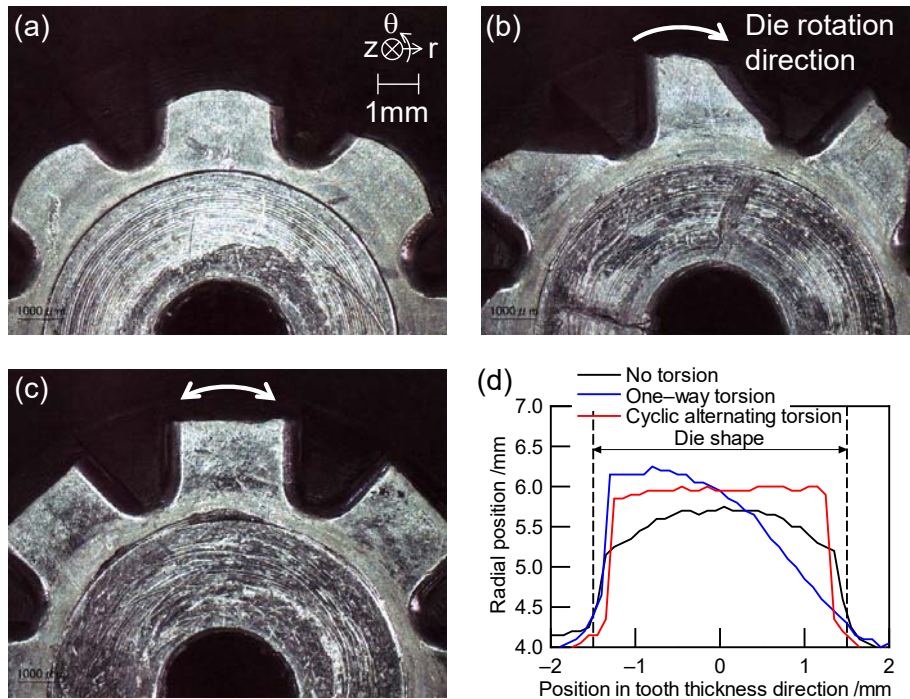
Experimental results of shape of extruded workpiece at tooth part in lateral extrusion with $s = 5.0$ mm; (a) no torsion, (b) one-way torsion, (c) cyclic alternating torsion, (d) tooth profiles.
